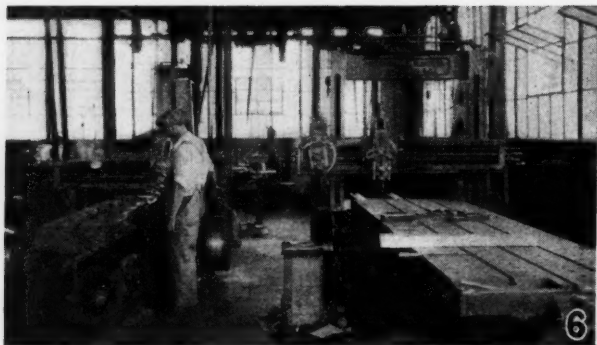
These two planers provide for machining heavy work. Fig. 7—Two of the five milling machines.
